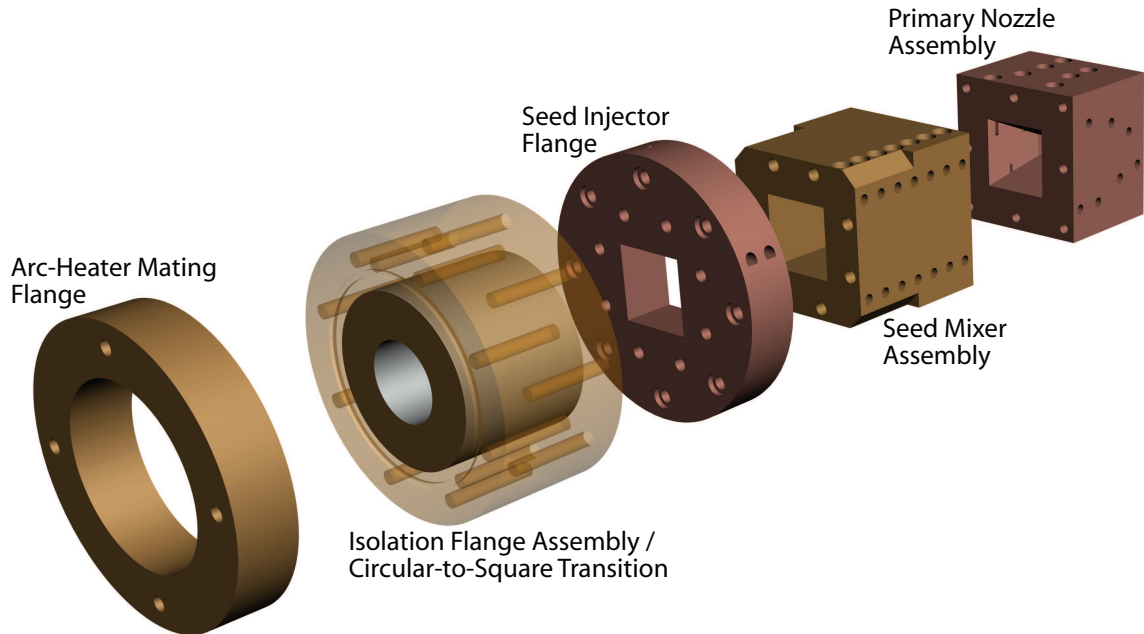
Exploded schematic of entrance flow-path assembly for MAPX. The major pieces include (1) the ceramic isolation flange, (2) the water-cooled seed injector flange and mixer assembly, and (3) the water-cooled primary nozzle assembly [2].
